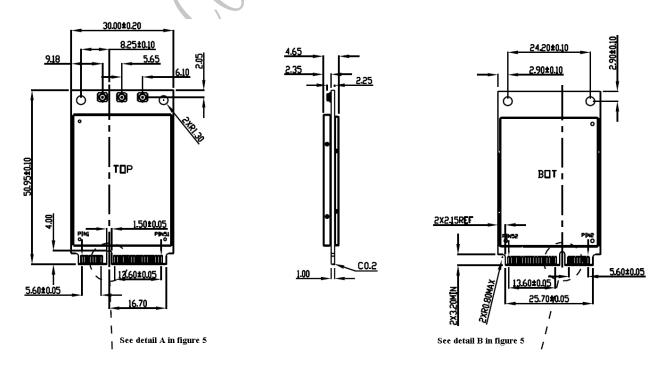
Dimensions of SIM7230-PCIe (Unit: mm)
